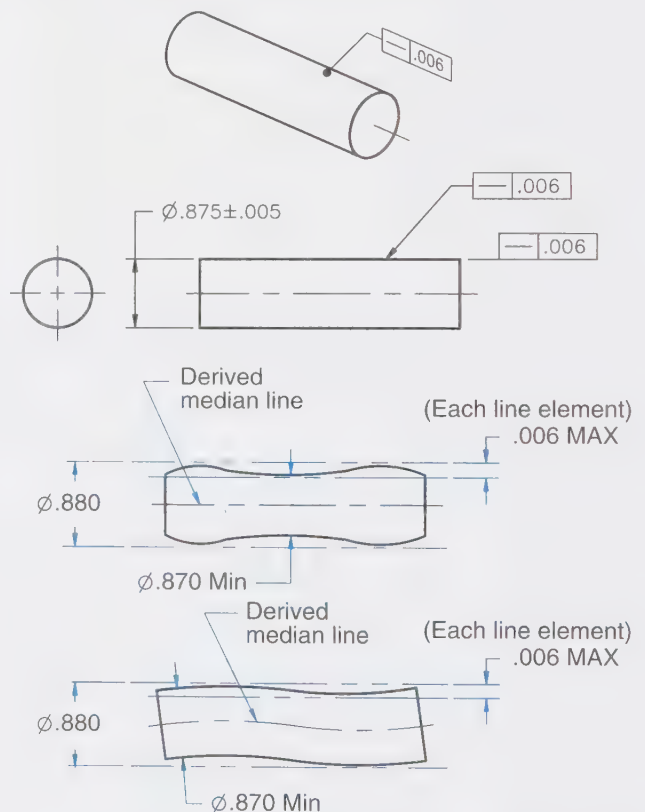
(#) shows the interpretation of a size tolerance and a straightness tolerance. The size dimension between the top and bottom surfaces has a maximum limit of .880". The part has a perfect form boundary at the dimension of .880", and no surface variations may extend outside this boundary. The size dimension has a minimum limit of .870", and no measurement across the part may be less than this value.
